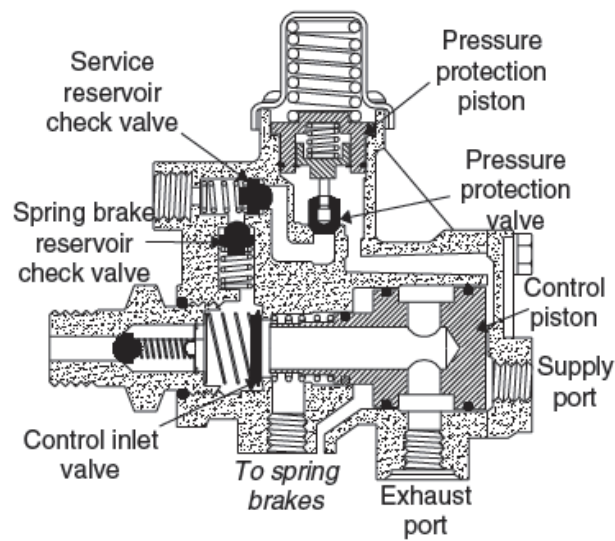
Spring Brake Control Valve – SR3 – Cross Sectional View
